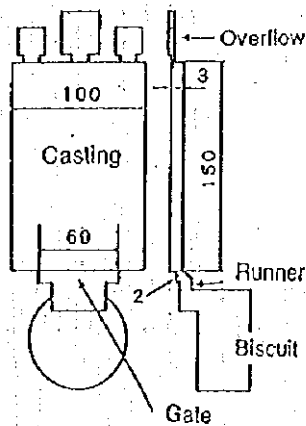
Geometry of flat plate produced by horizontal die casting machine
